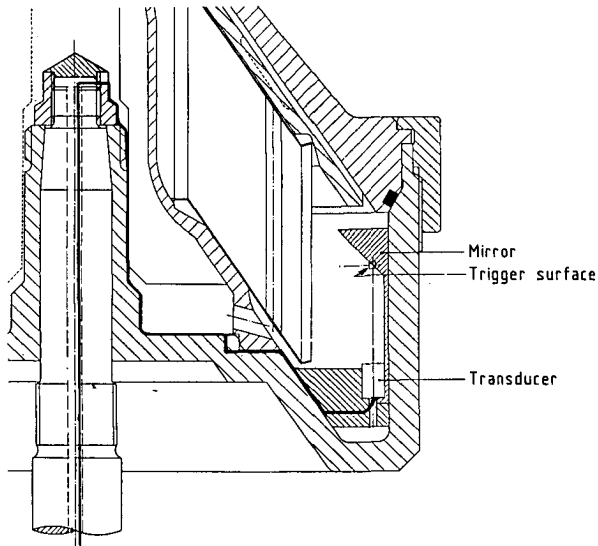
Assembly drawing of the ultrasonic transducer in the separator bowl
